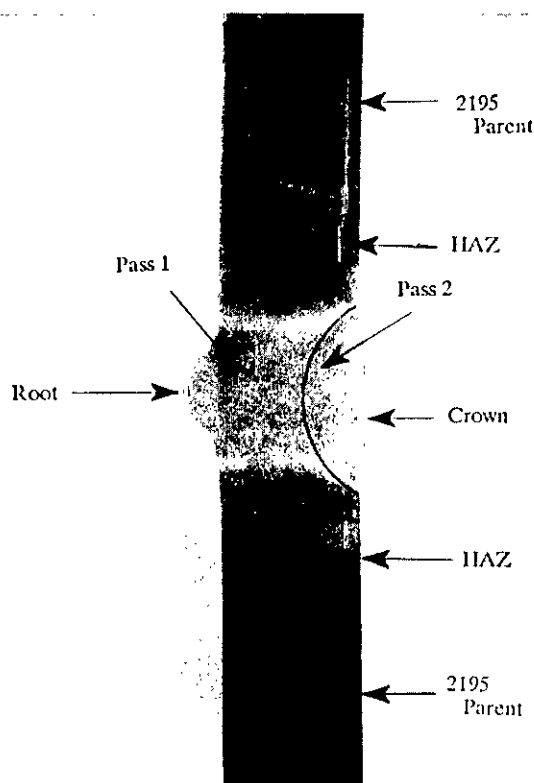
Macroetch photograph of vertical up (3G) two-pass weld sample of 2195/2195.
